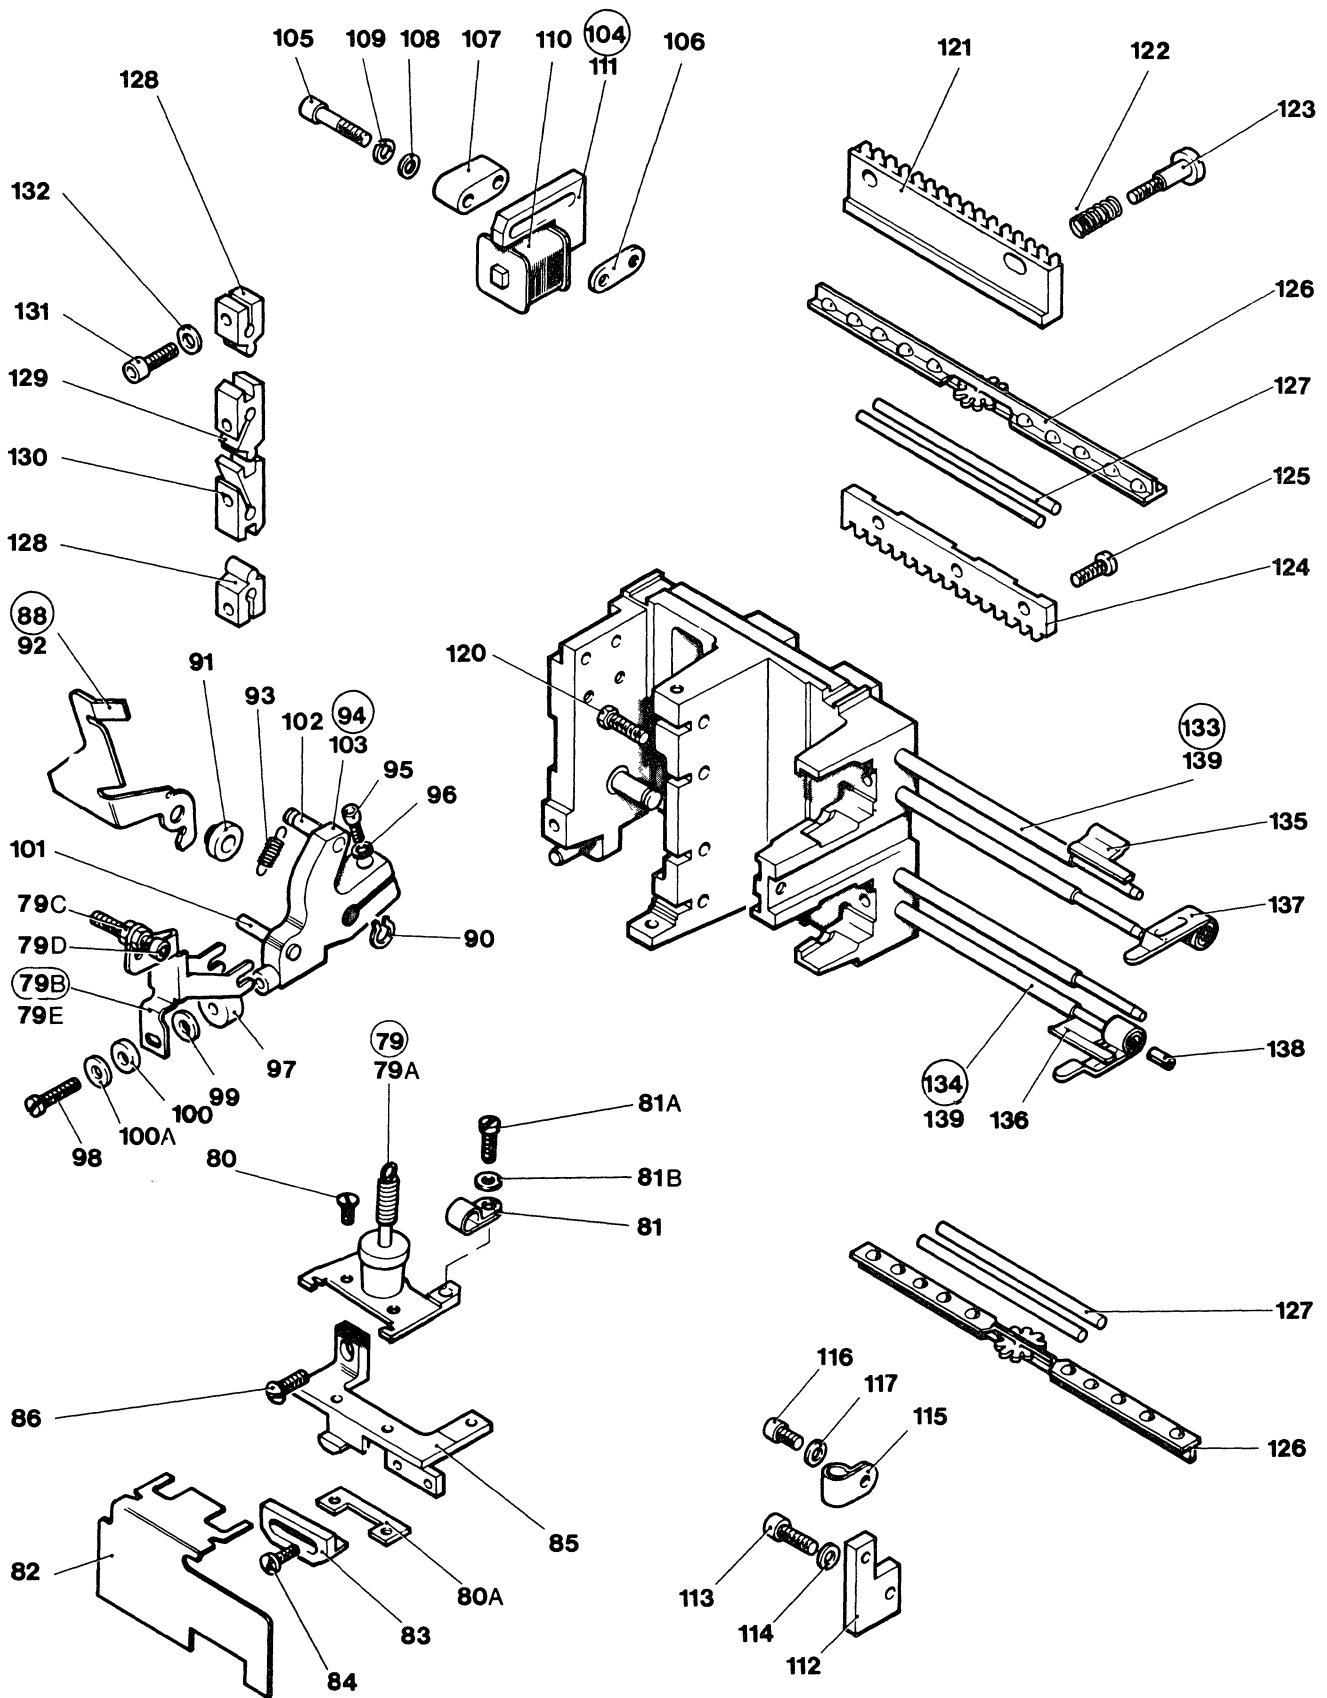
ACTUATOR ASSEMBLY (PART 3 OF 4)
